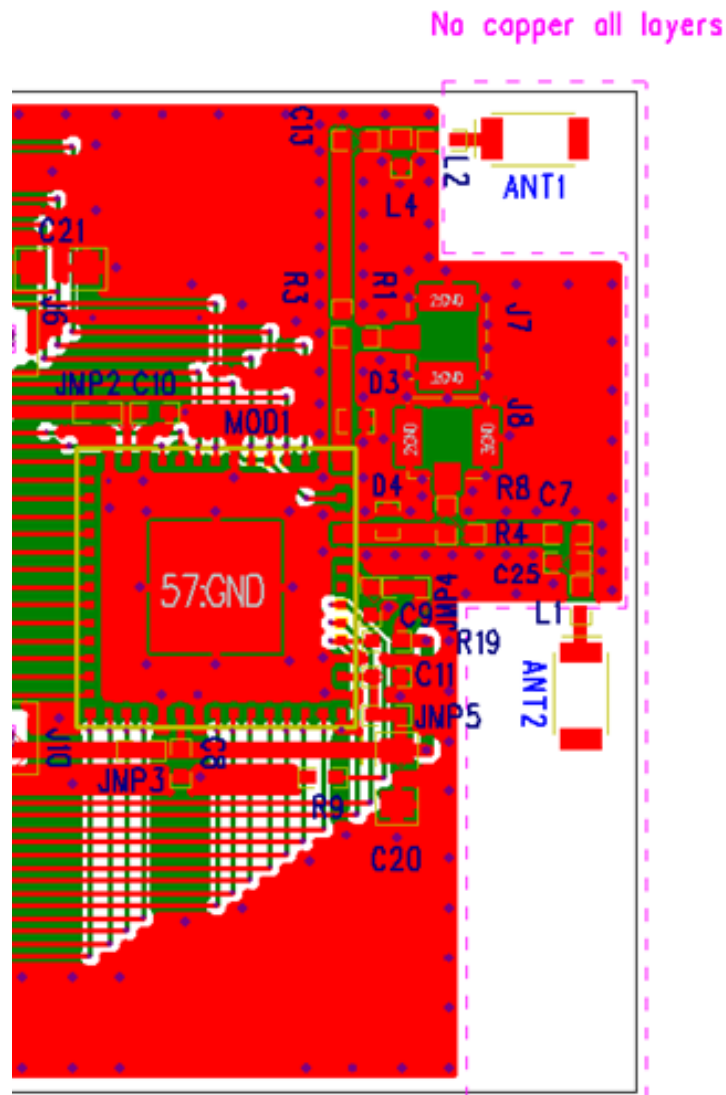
2-Layer Reference Design Chip Antenna PCB Layout
